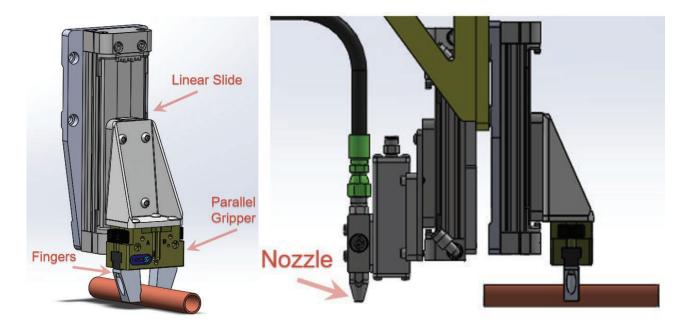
CAD model of the pick and place system assembly (left) and location to be installed (right)
